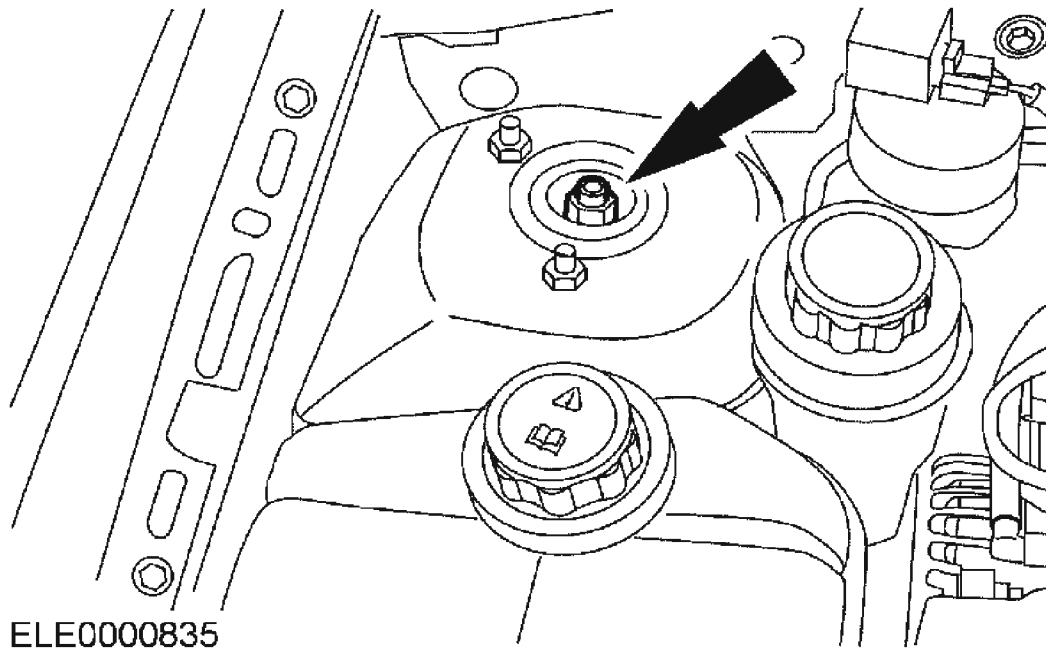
Identifying Right-Hand Suspension Strut Top Nut
